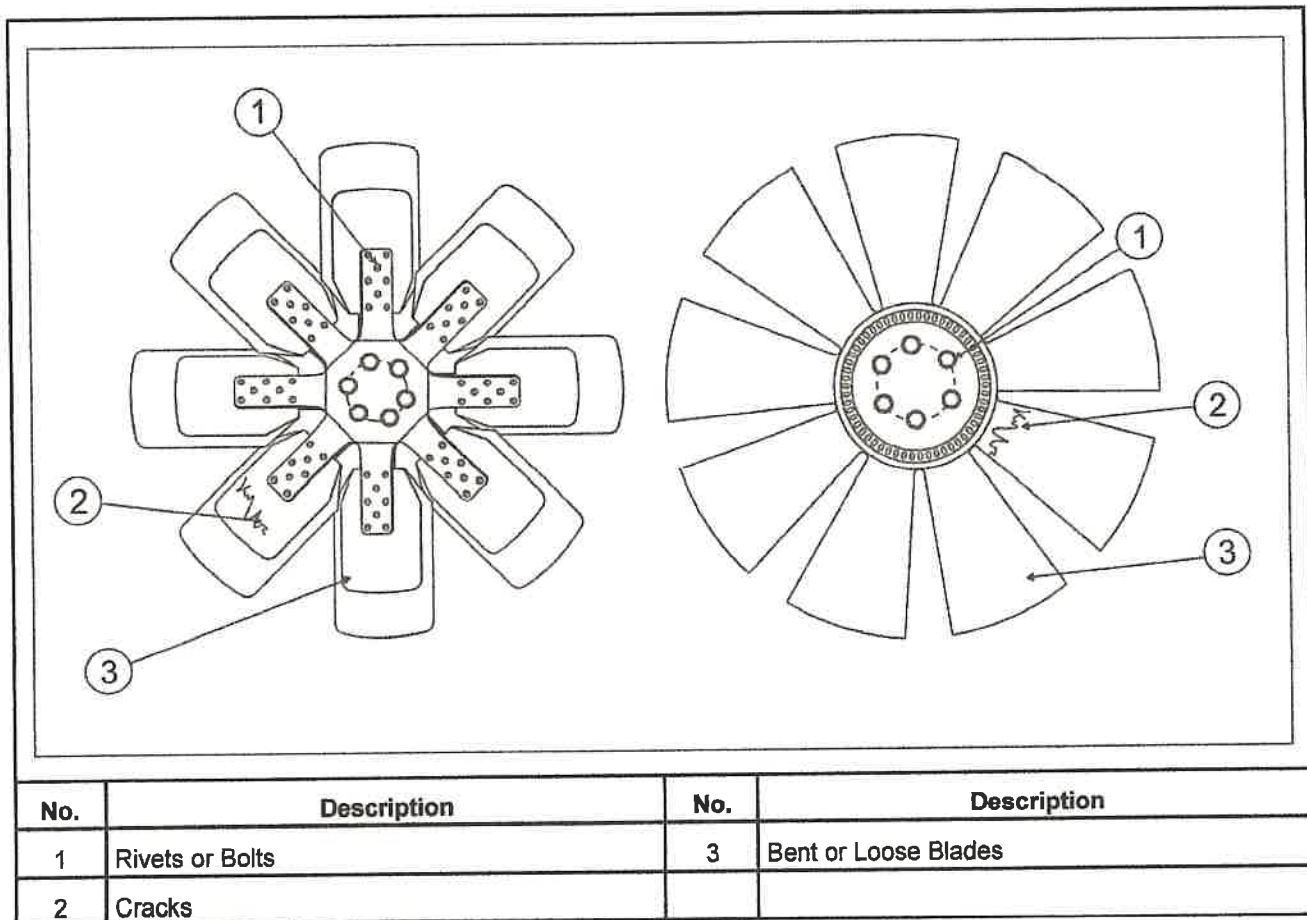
COOLING FAN INSPECTION CHECKPOINTS
